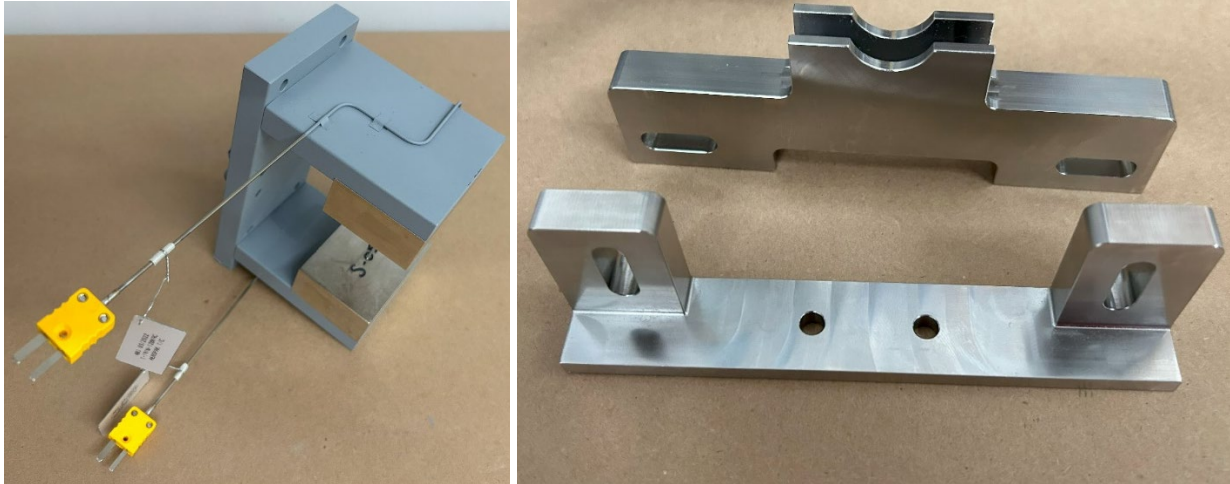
Assembled magnet mount with high-temperature SmCo magnets and thermocouples installed (left). Newly fabricated mounting bracket that eliminates a potential cold spot introduced by the old bracket design (right).
